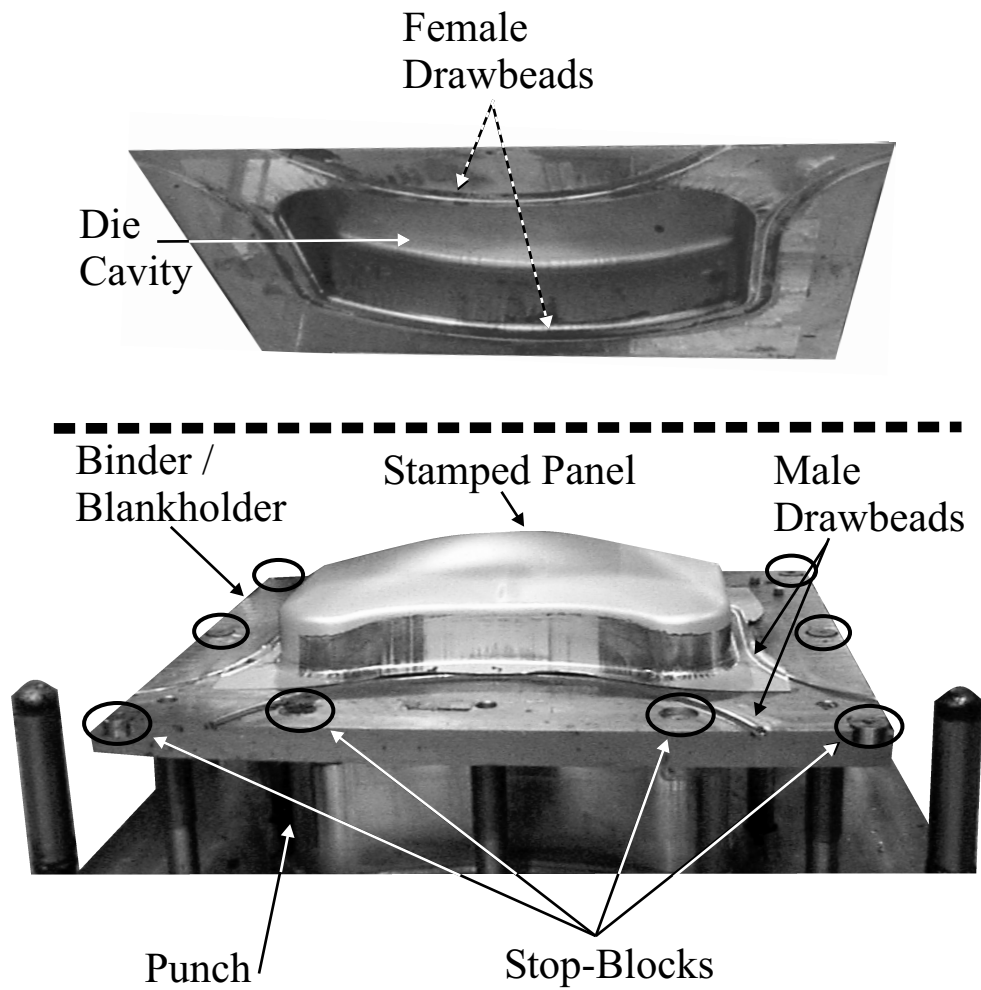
IRDI Die Set. The top half of the figure is rotated to show the die cavity and surrounding female drawbeads, while the lower half shows the punch, the blank holder, the stop-blocks and male drawbeads. The visible stop-blocks are circled.
